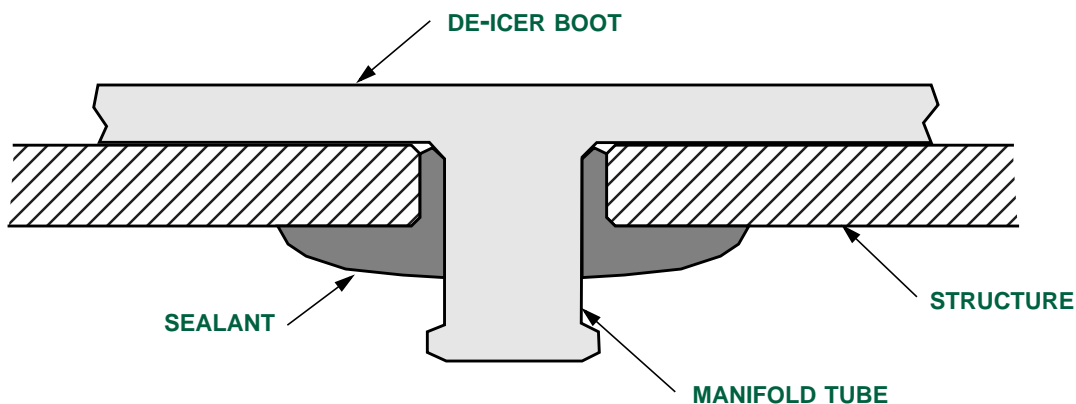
CROSS SECTION OF SEALANT AROUND MANIFOLD TUBE
